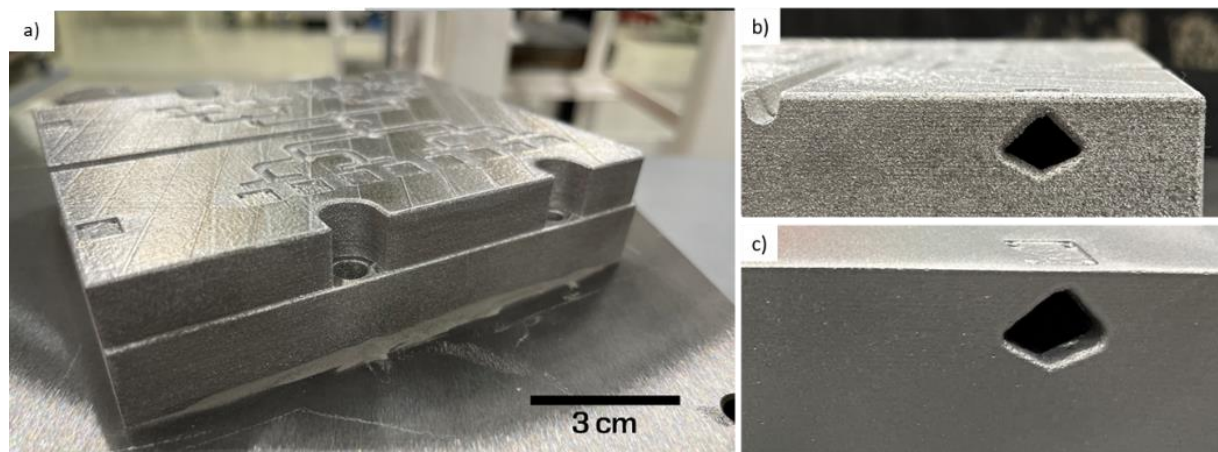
A demo mold in prototype alloy, a) general view, b) sharp angle cooling channels before shot blasting, and c) after shot blasting
